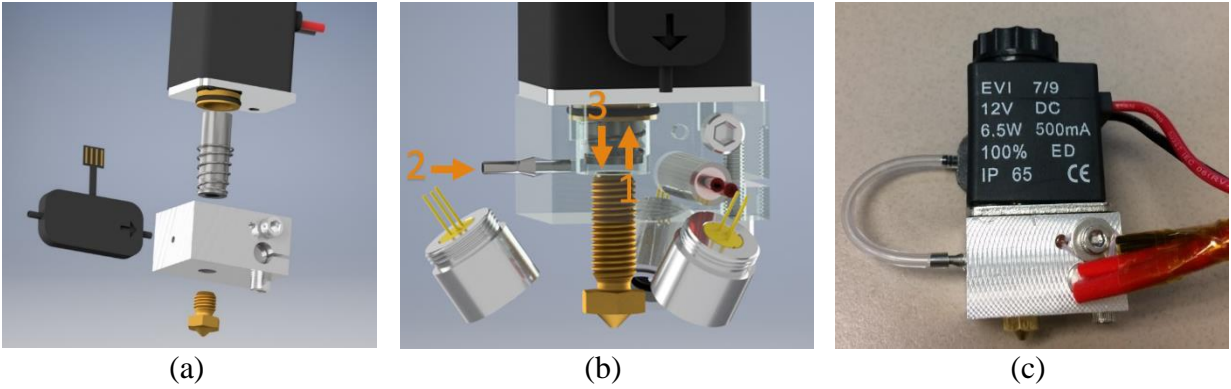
(a) Exploded view of jetting head (b) actuation schematics (c) fabricated prototype
